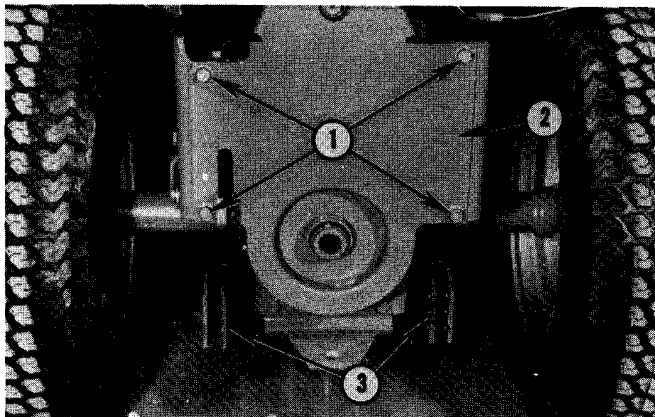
HITCH PARTS AND PTO SHIELD REMOVED
